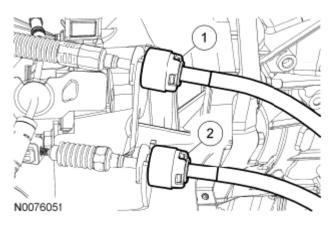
Attaching Transaxle Cables To Bracket Courtesy of FORD MOTOR CO.
